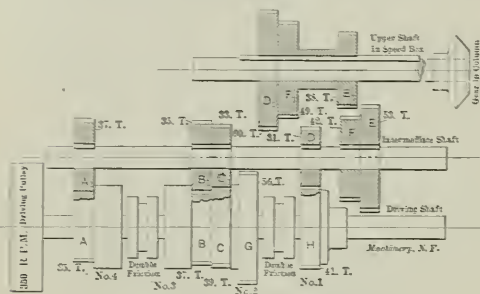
Arrangement of Clutches and Gearing in the Speed Changing Mechanism.
